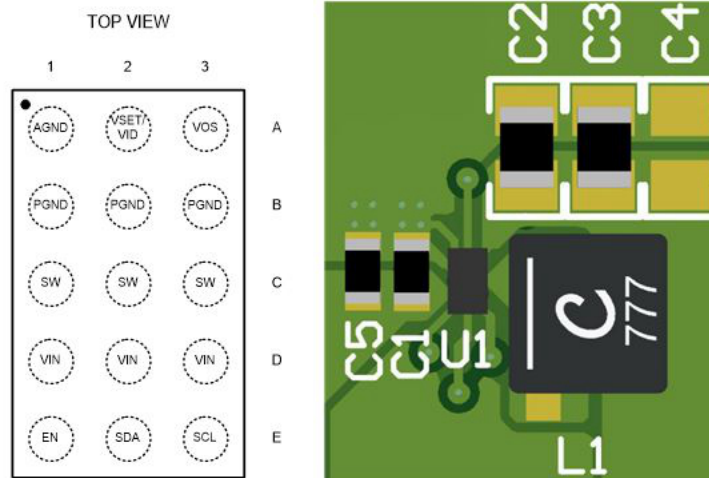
Pinout of the [TPS62866](#) With a Typical PCB Layout
